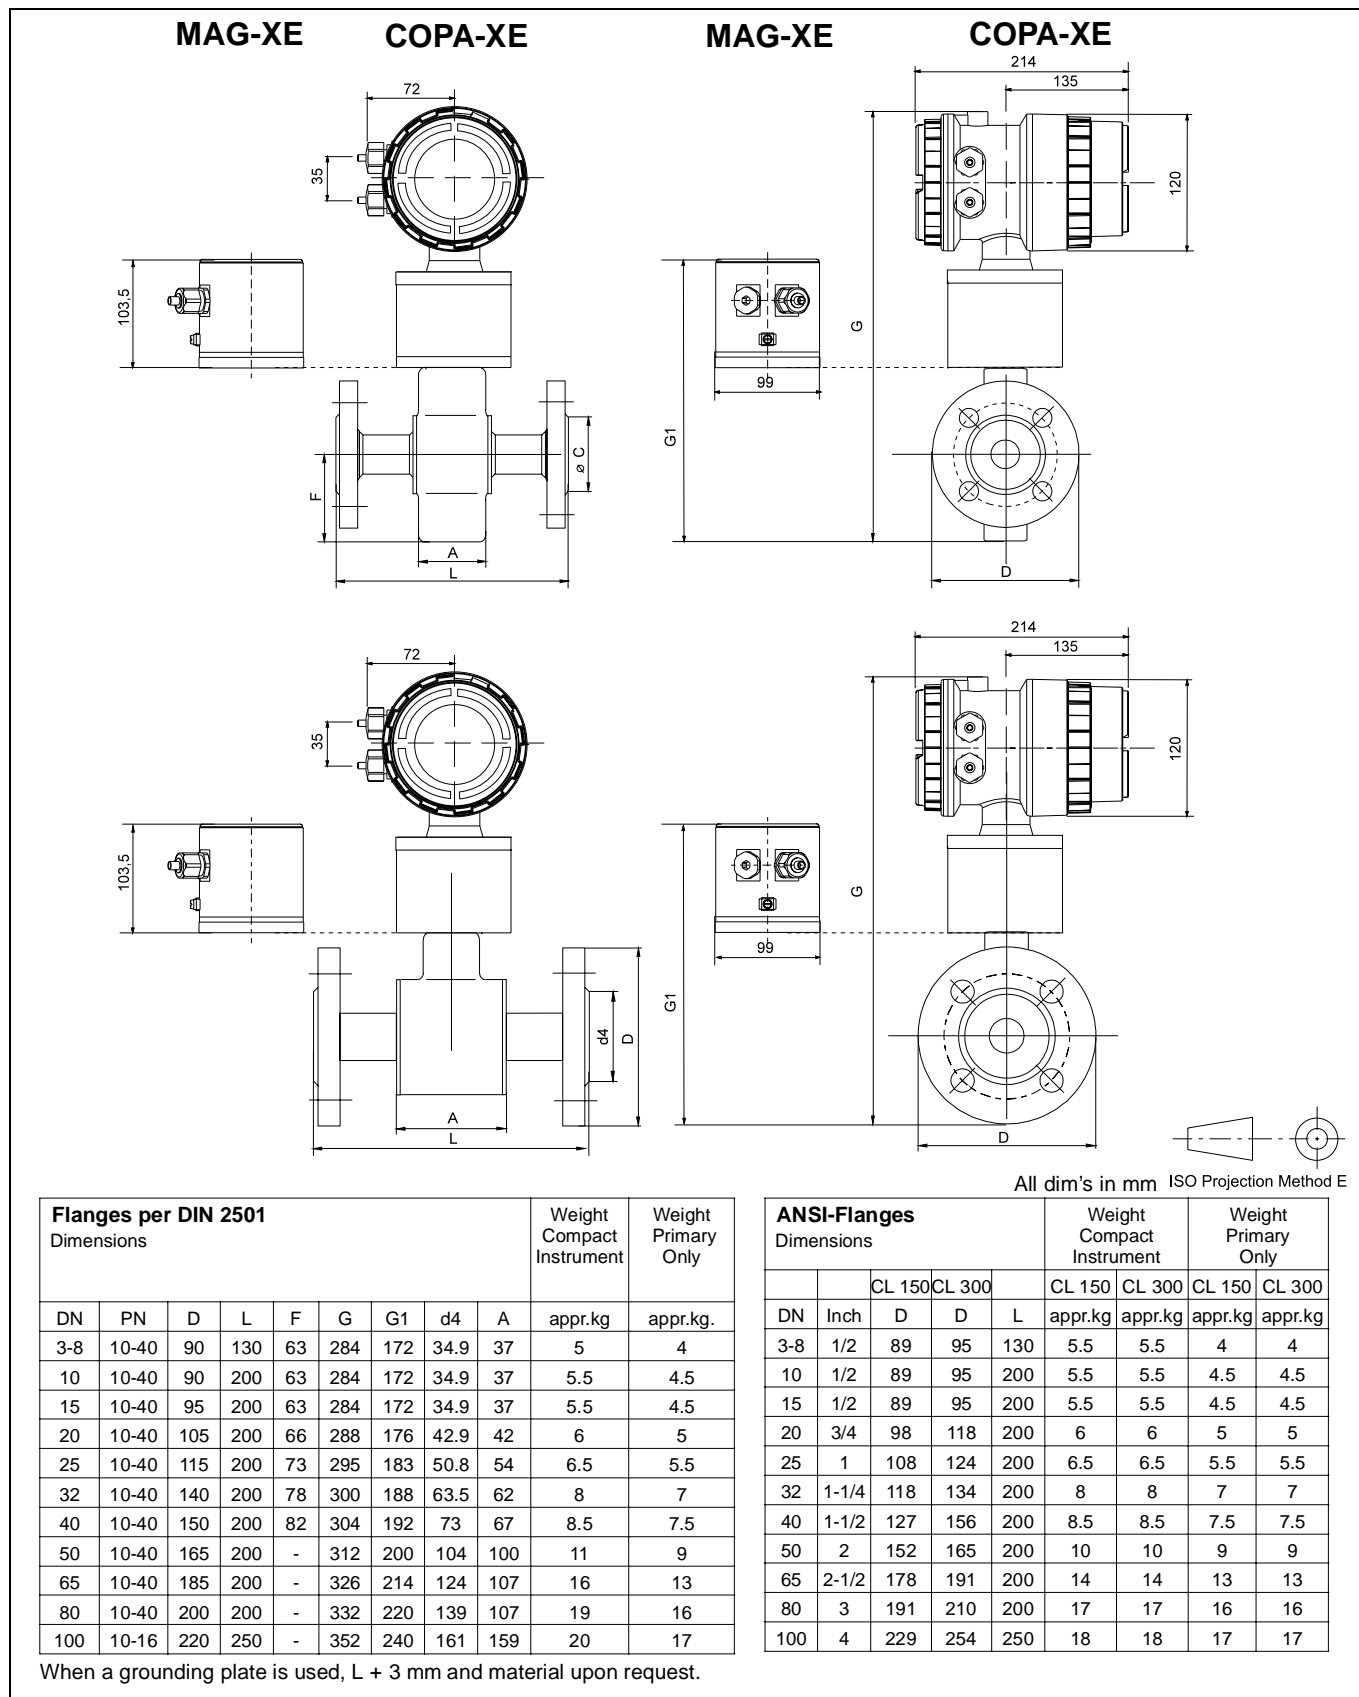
Flowmeter Primary, Stainless Steel, Flanged 1/8" to 4" / DN 3 to DN 100
